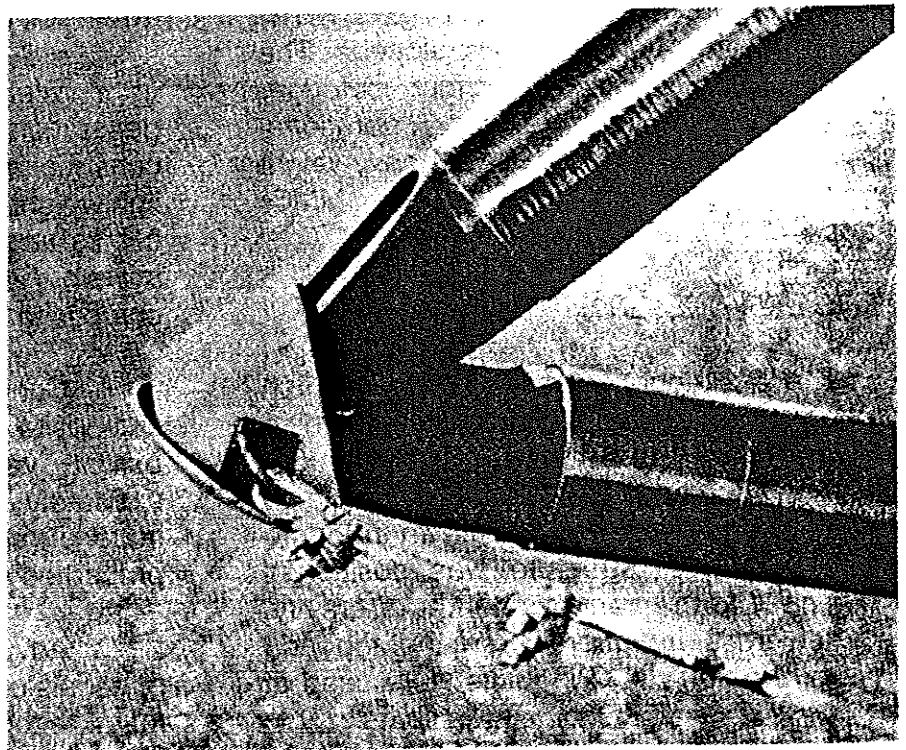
OUTRIGGER SKID ASSEMBLY
